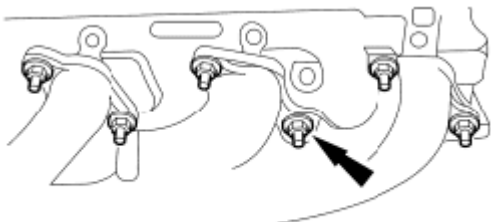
Locating Bolt And Oil Level Indicator Tube
